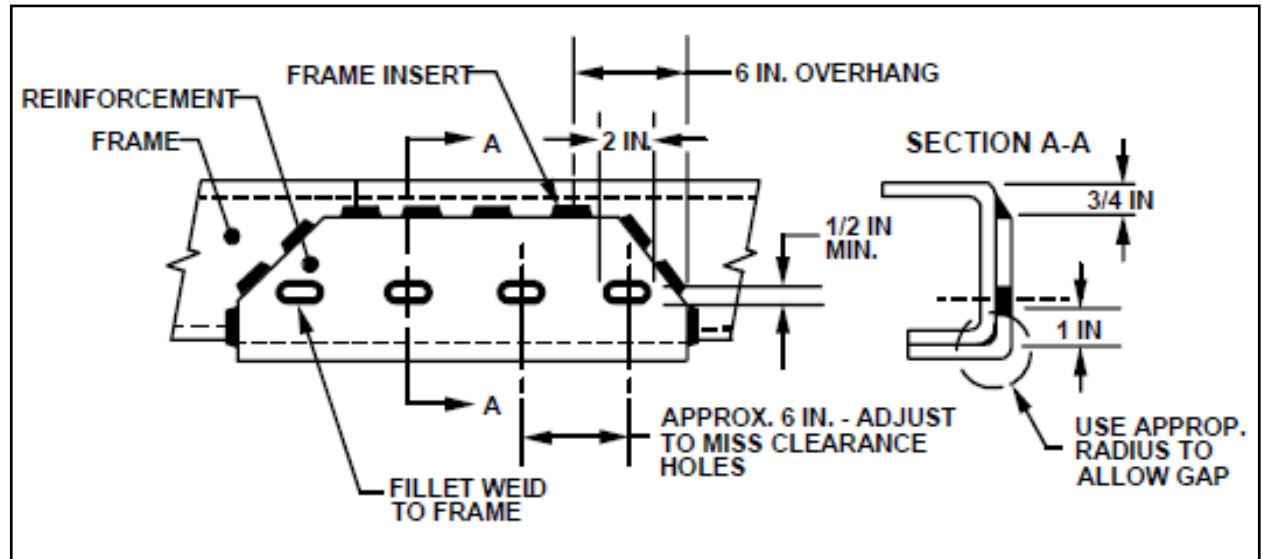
Preferred Method for Reinforcement and Welding
